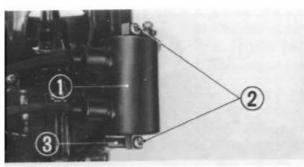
① Ignition coil ② Spacer ② 6 mm screws
